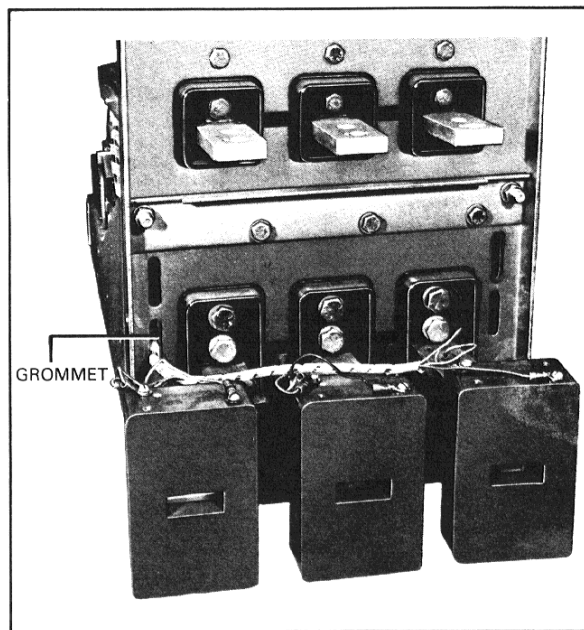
Attaching Wiring Harness to Sensors DB-25
